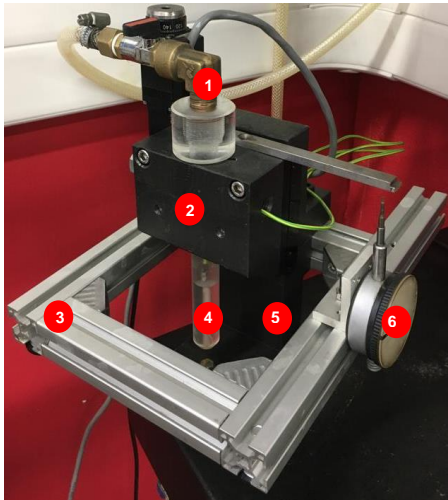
Machine tool elements: 1 – Electrolyte injection circuit; 2 – Mobile head; 3 – Secondary Structure; 4 – Tool grip; 5 – Fixed head; 6 – Comparator clock.
